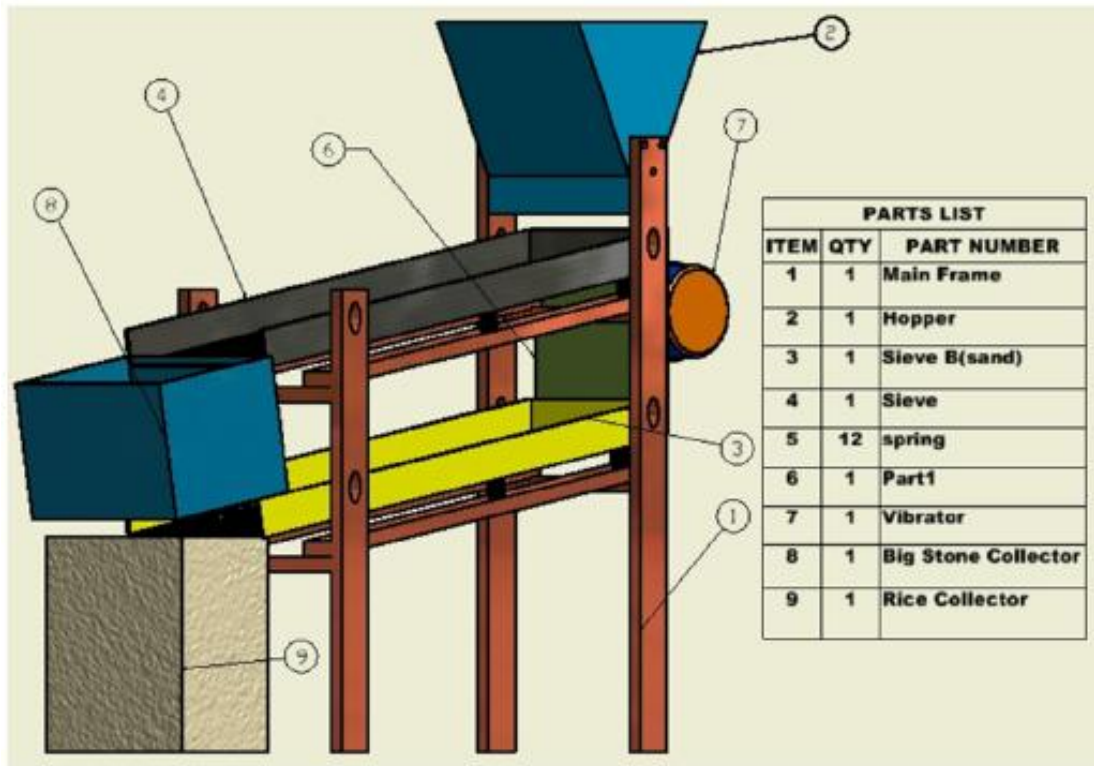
Assembled isometric drawing of rice de-stoner [41]
